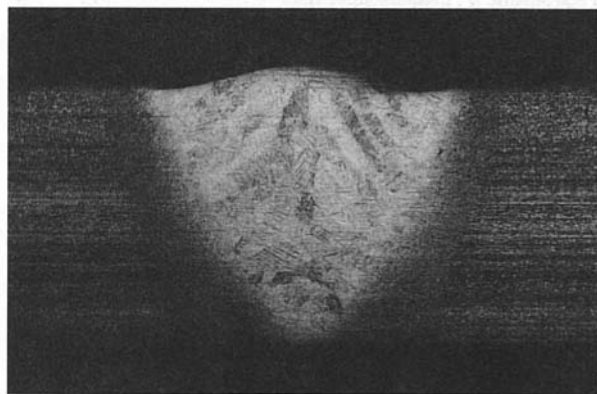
Macrograph of an EB weld, magnification 30 $\times$
